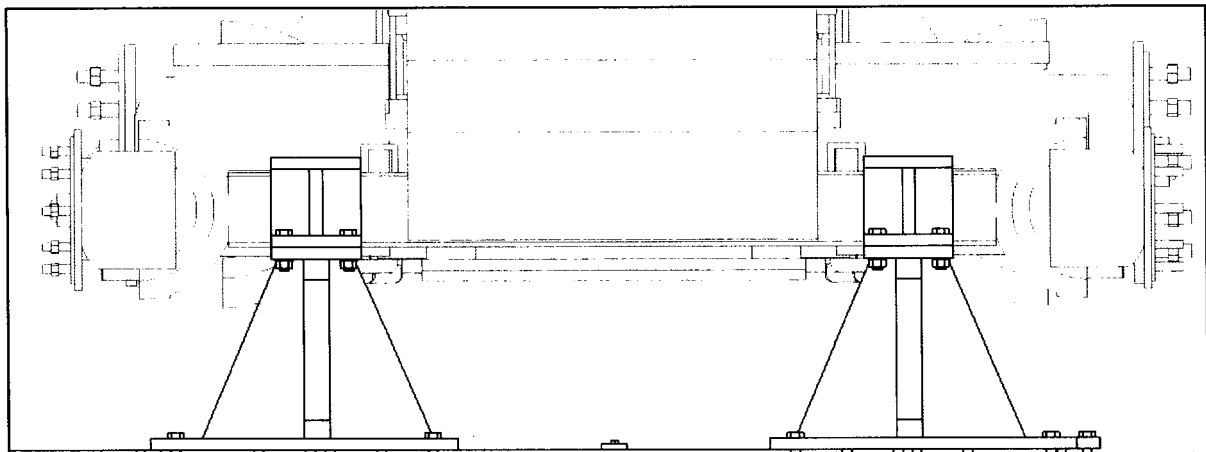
Supporting the Backhoe's Front Axial with Front Axial Supports and Caps
